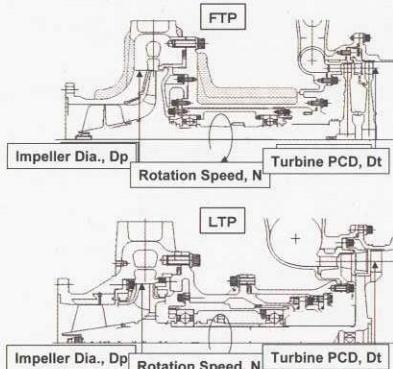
Simplified Turbopump Design Tool Model for some components
